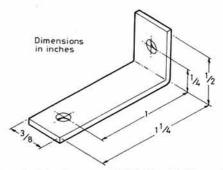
Brackets for fixing fuse panel PCB5. Material: 18swg aluminium or as available. Holes are 6BA clearance
